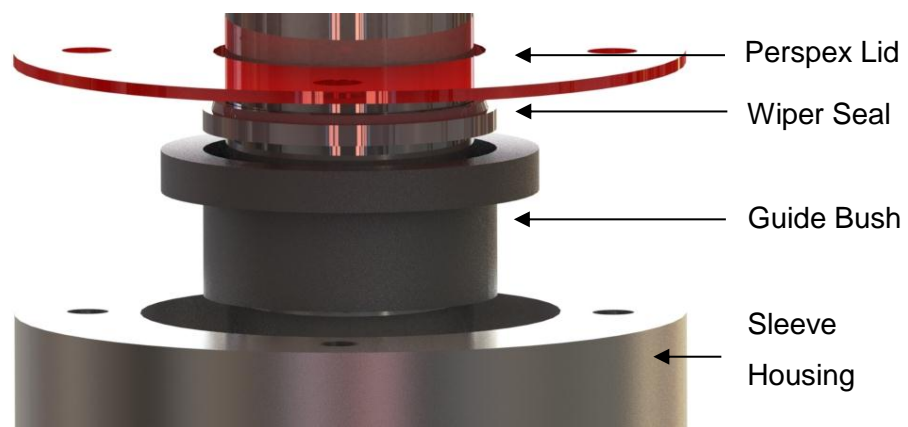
Partial assembly view of the Guide Bush and surrounding components
